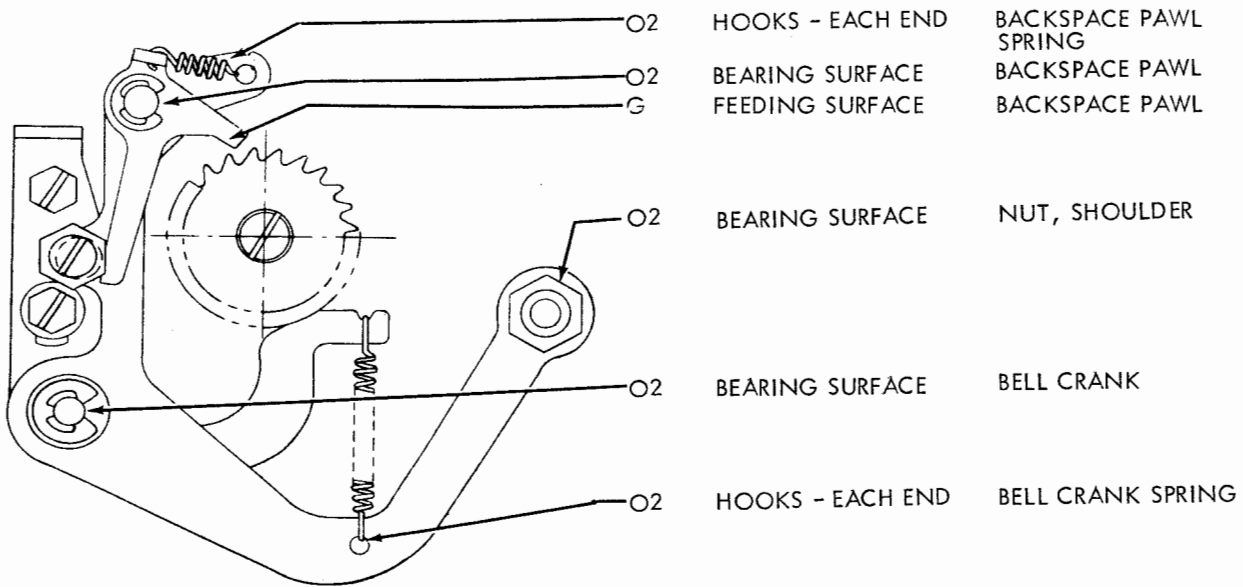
B. TYPING REPERFORATOR TT-373/UG, AND TT-375/UG LUBRICATION - PERFORATOR MECHANISM
